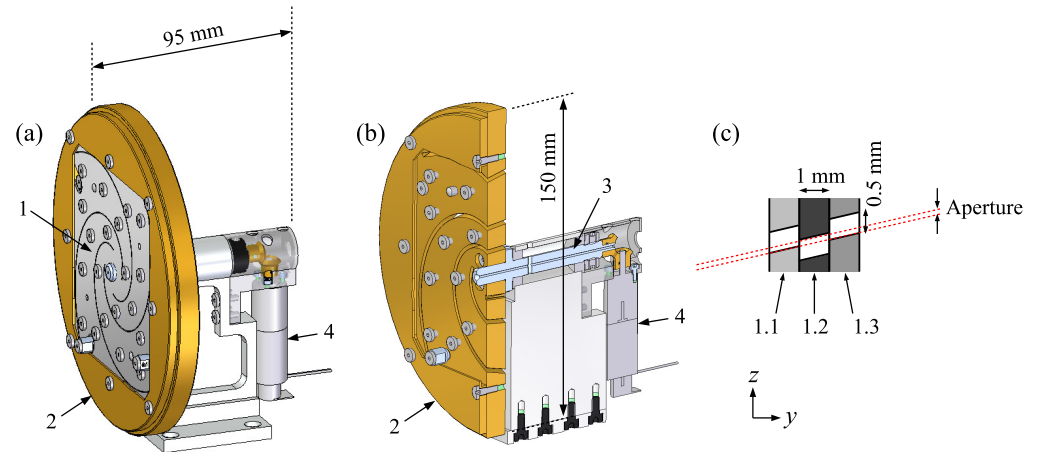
(a) External and (b) cross-sectional views of the design of the compact rotating spiral slit composed of tungsten blade plates (1), a blade holder (2), a pipe shaft (3), and a compact motor (4). (c) Schematic of the cross section of the tungsten blade plates with 0.5-mm-wide inclined through-grooves. An inclined slit aperture with a minimum gap of 20 μm is formed by aligning the first (1.1), second (1.2), and third (1.3) blade plates with a thickness of 1 mm.
